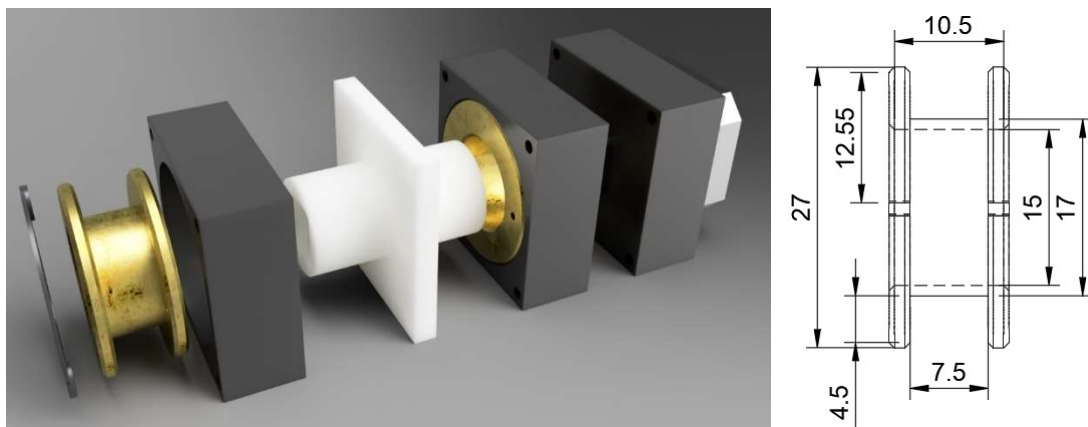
Rendered view of how the coils integrated with the ss-fluorometer sample holder with a dimensional sketch of the machined unwound coil body. All units in mm.
